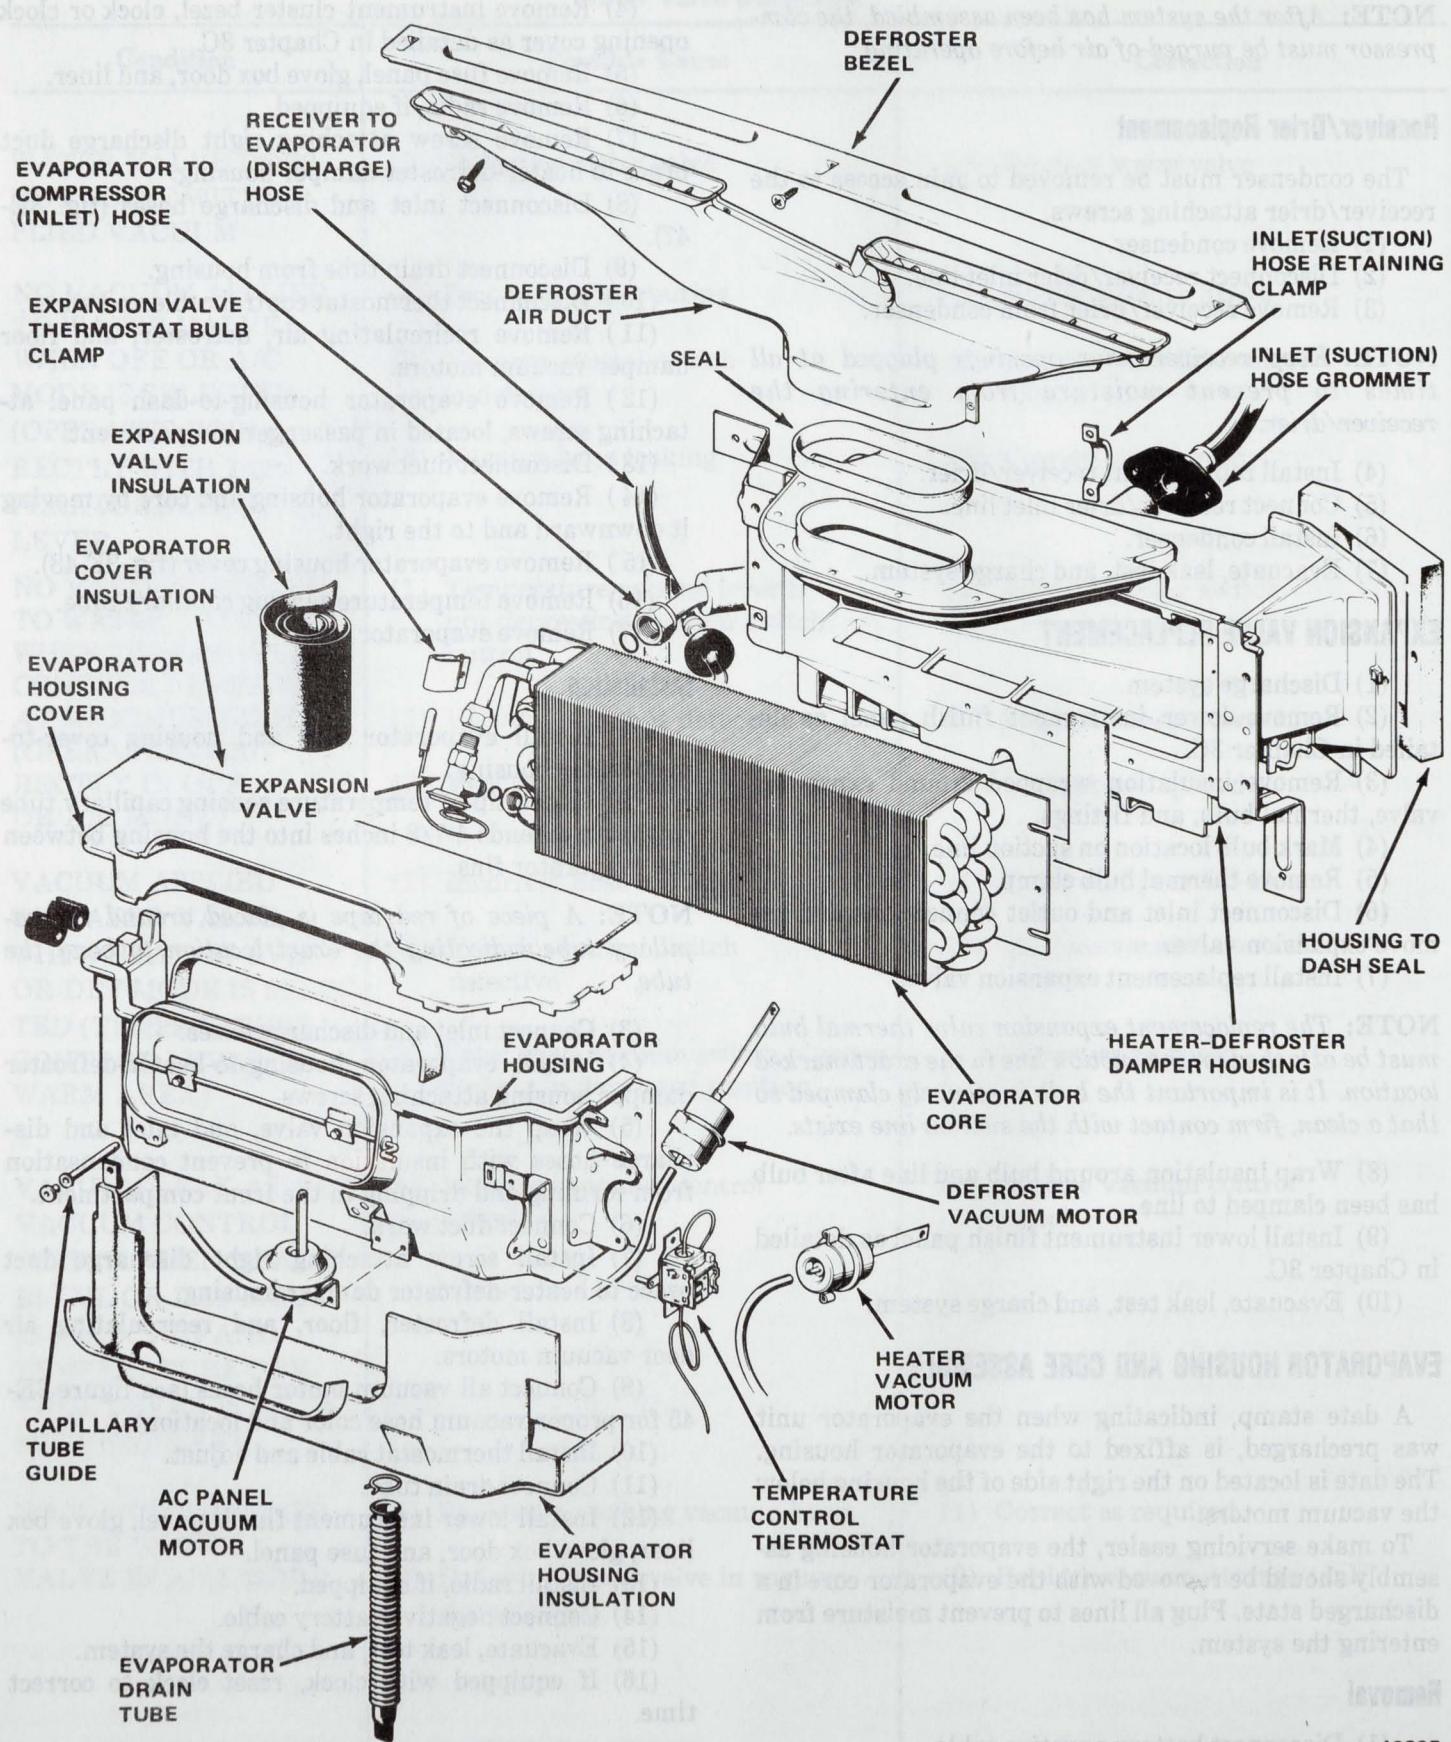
E-47 Evaporator Housing, Core, and Heater-Defroster Damper Housing Assembly
